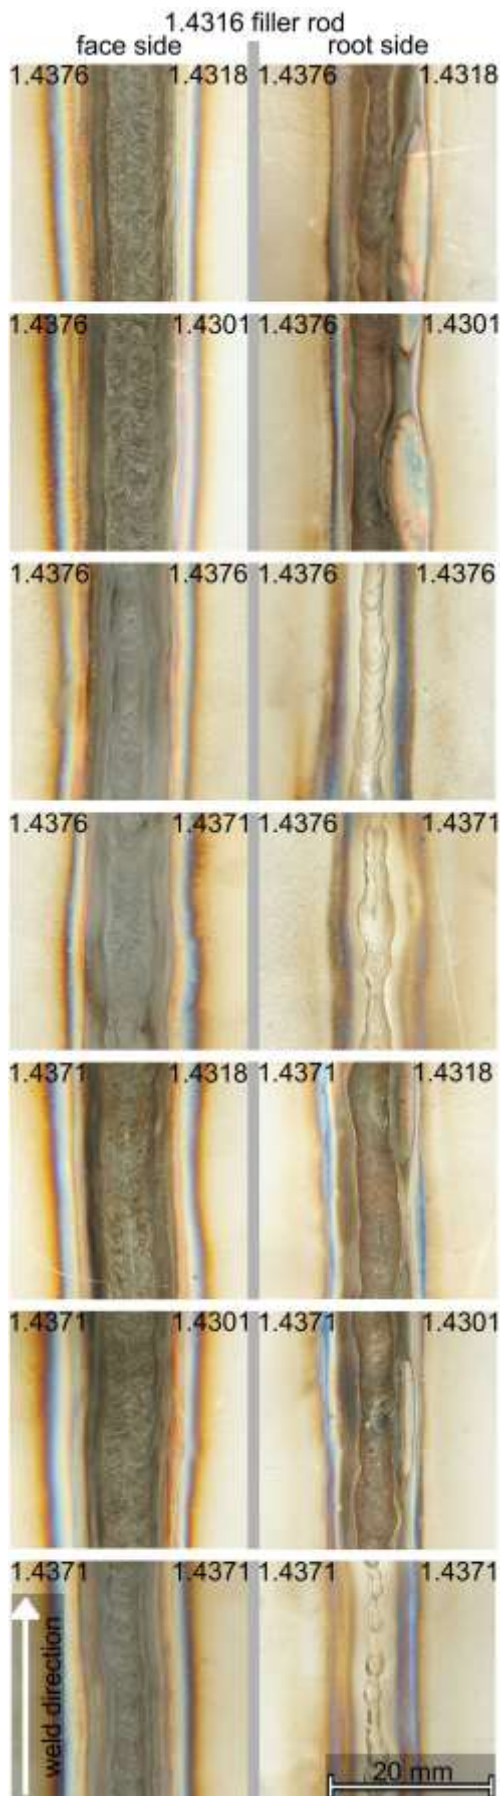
Macroimages from the face side (left) and root side (right) of the different joints welded with 1.4316 filler material
